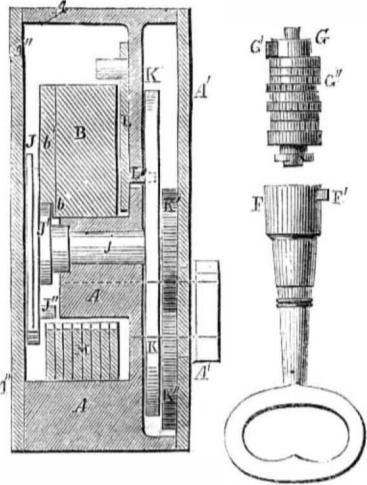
is a front view of the lock, with the outer plate removed. Figs. 2 and 3 are rear views, with the back plate removed; Fig. 2 showing the bolt thrown out, and Fig. 3 the same with the bolt drawn in. Fig. 4 is a transverse section of the lock, and Fig. 5 a side view of the key and bits slightly separated. Fig. 6 gives an end view of one of the bits, and also a similar view of the end of the core on which the bits are mounted.
